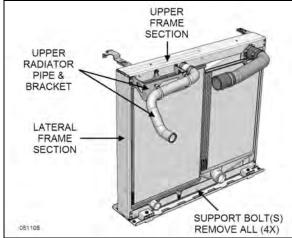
COOLING PACK PARTS TO BE REMOVED FOR RADIATOR REPLACEMENT
